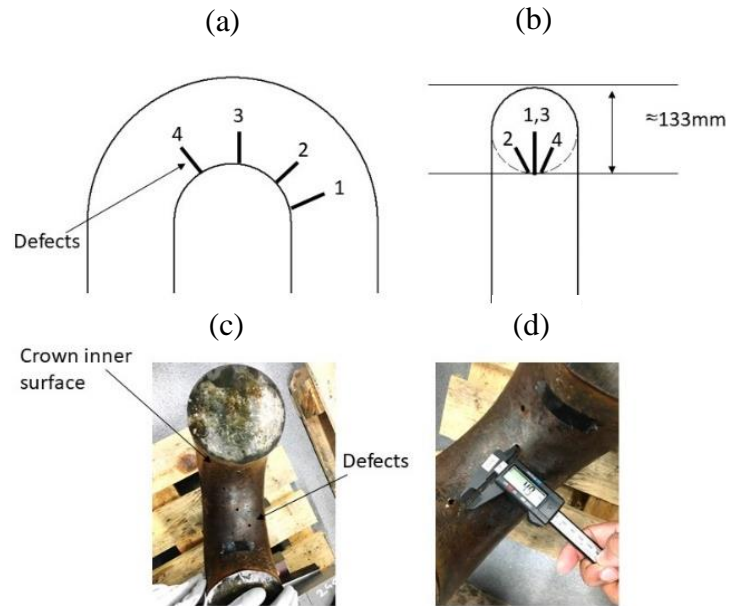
(a) Drill hole defects in chain crown (side view); (b) drill hole defects in chain crown (cross-sectional view); (c) defects image; (d) defect hole diameter (sample)
